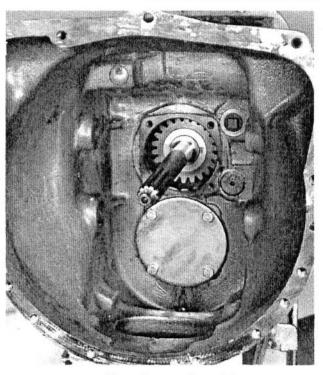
Thrust Washer and Shim Properly Positioned on Input Shaft
